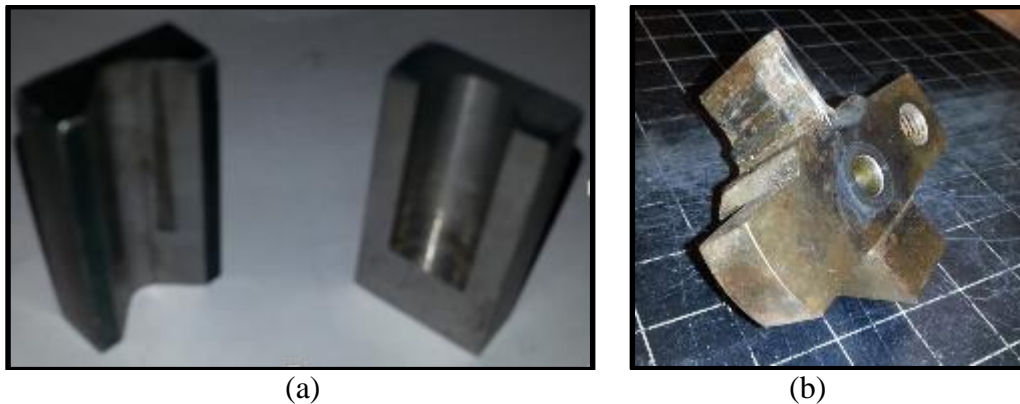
Izod Specimen Clamping Device (a) and Impact Striker (b)
